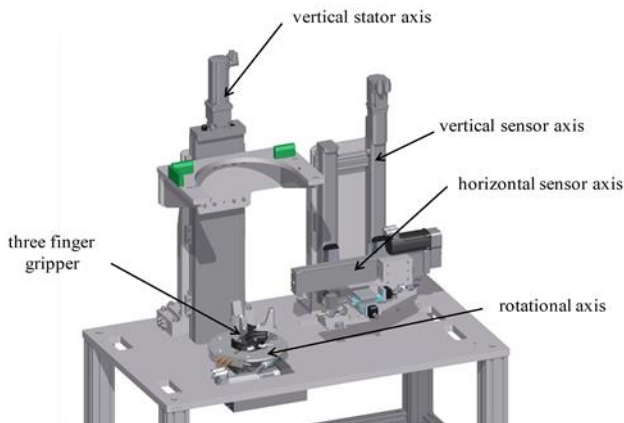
Principal set up of the test bench for space-resolved inspection of single stacks and assembled rotors [37].
